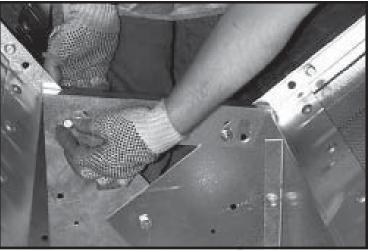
Loosely bolting plenum closure door angles (*RH* and *LH*) to hopper bulkhead, above meter roll upper shield assembly.
